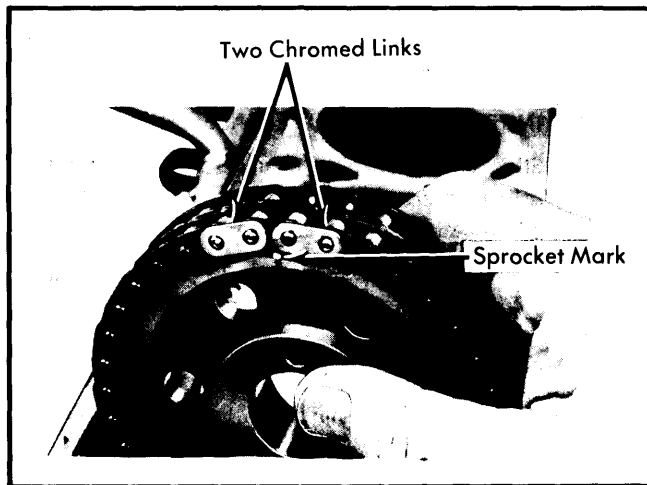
Aligning Camshaft Sprocket and Timing Chain
